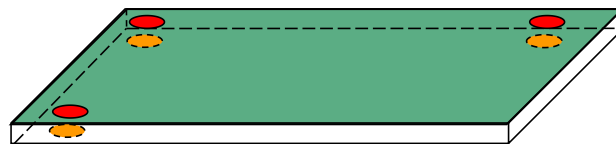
Both sides of a double sided PCB should generally be consistent with each other.
